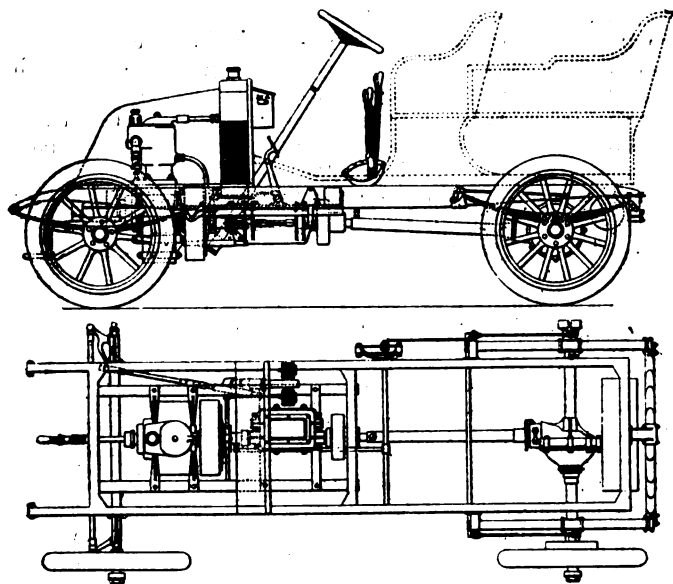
Elevation and Plan of the Bailleau Light Car.
